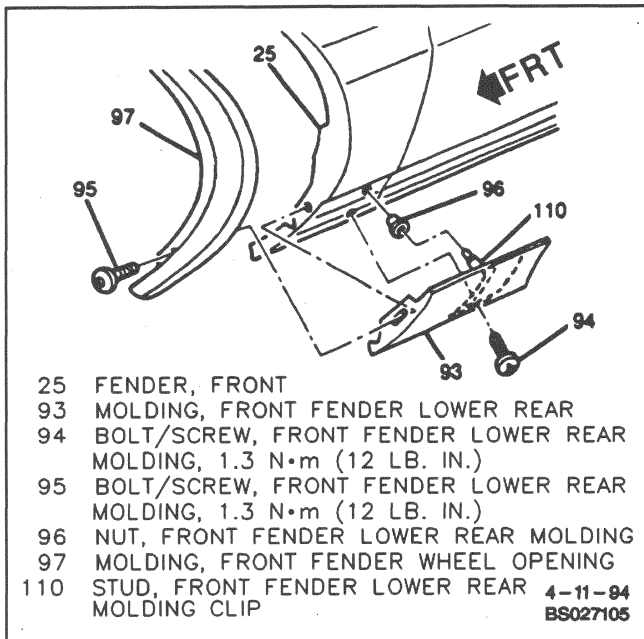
Front Fender Lower Rear Molding-(Chevrolet Sedan and Wagon, Buick Sedan)
